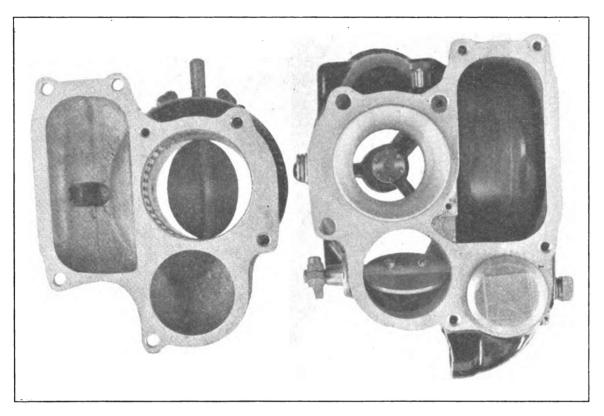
Stromberg NA-S6 carburetor. Sectional view.
